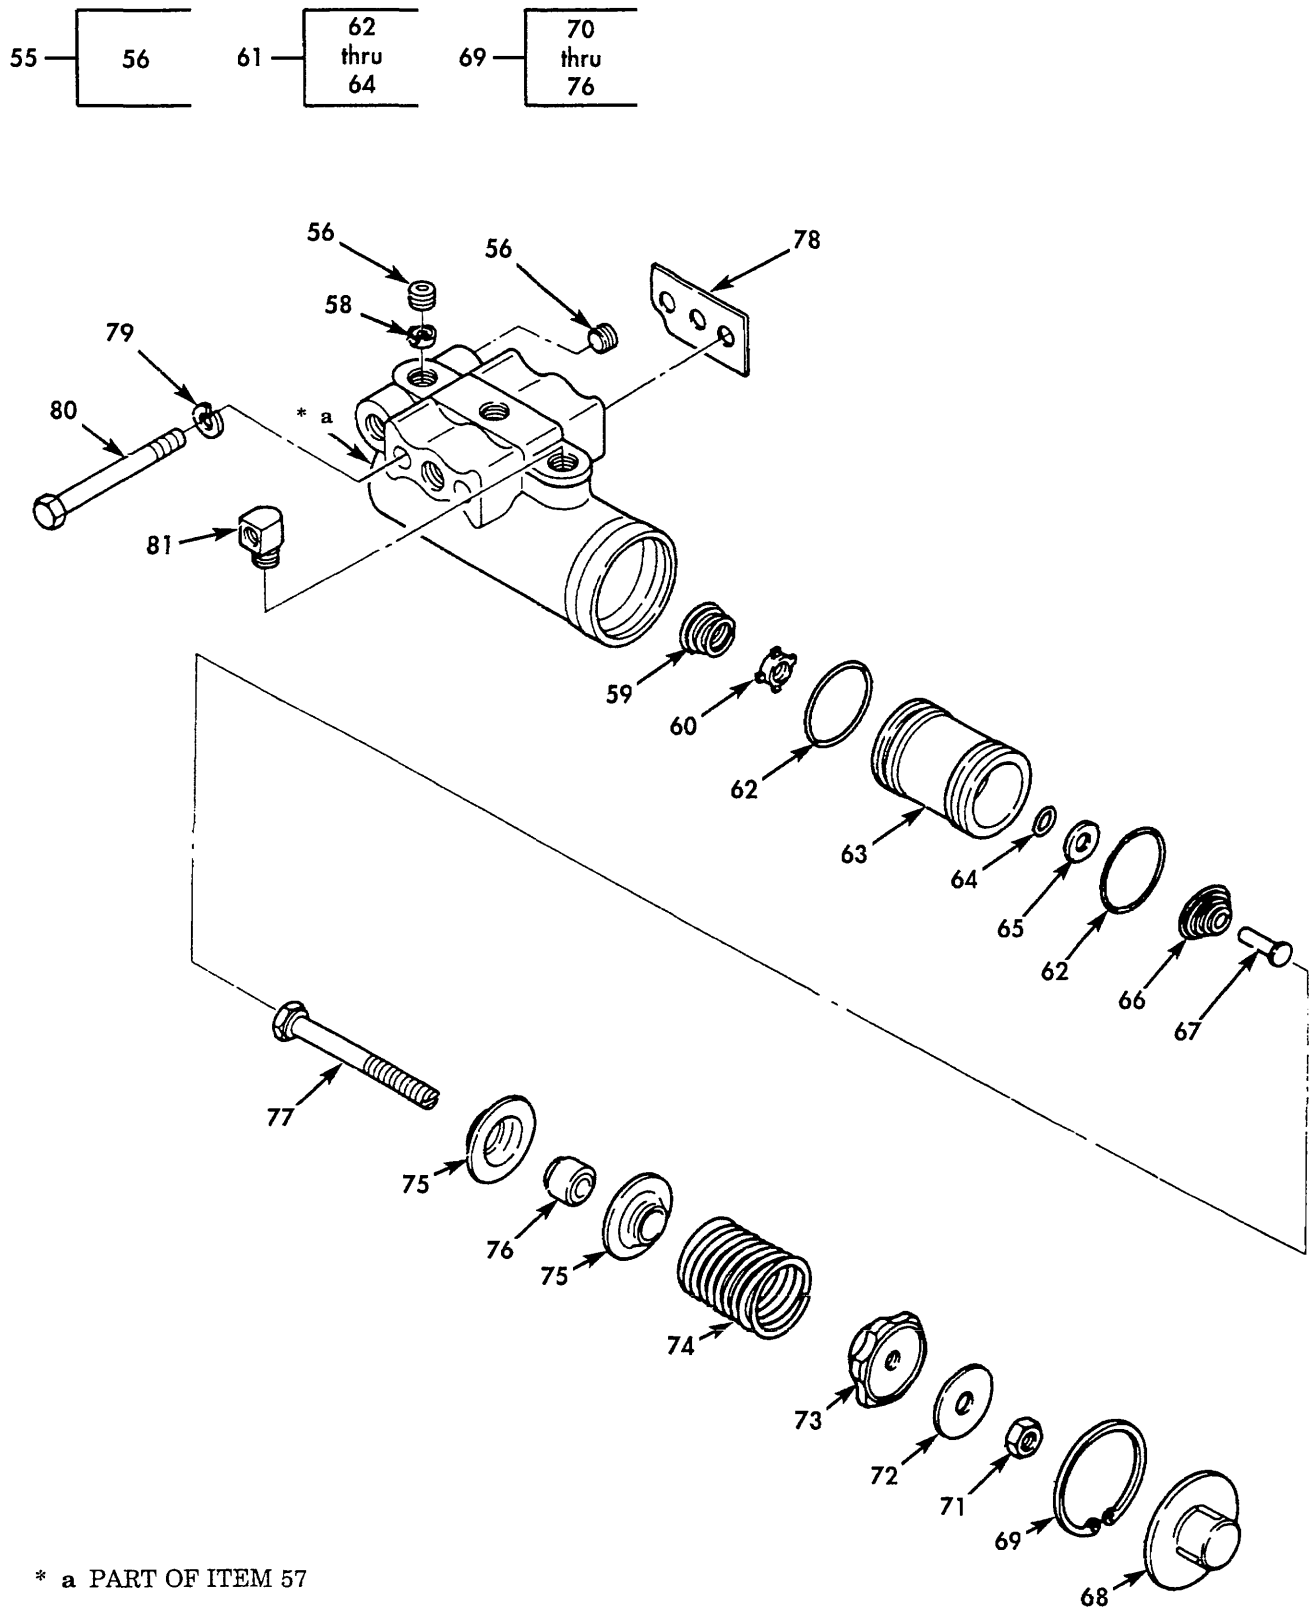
Air Compressor and Governor Assembly (Sheet 2 of 2).
